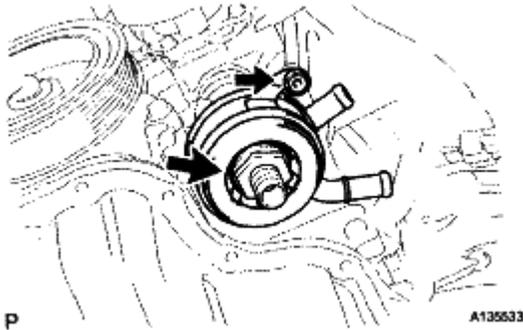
Locating Oil Filter Union, Plate Washer, Nut, Oil Cooler And O-Ring
